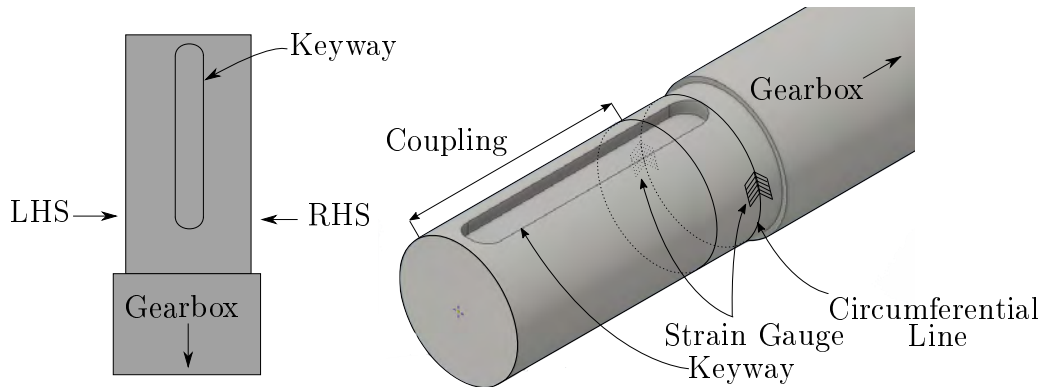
Input shaft of the M4ACC gearbox with strain gauge rosettes positioned in the ideal position, and illustration of left-hand-side (LHS) and right-hand-side (RHS) convention.
